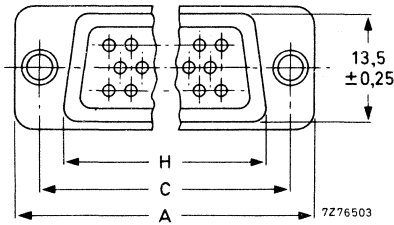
Terminal side of pin (or socket) connector; see also Table 2.
